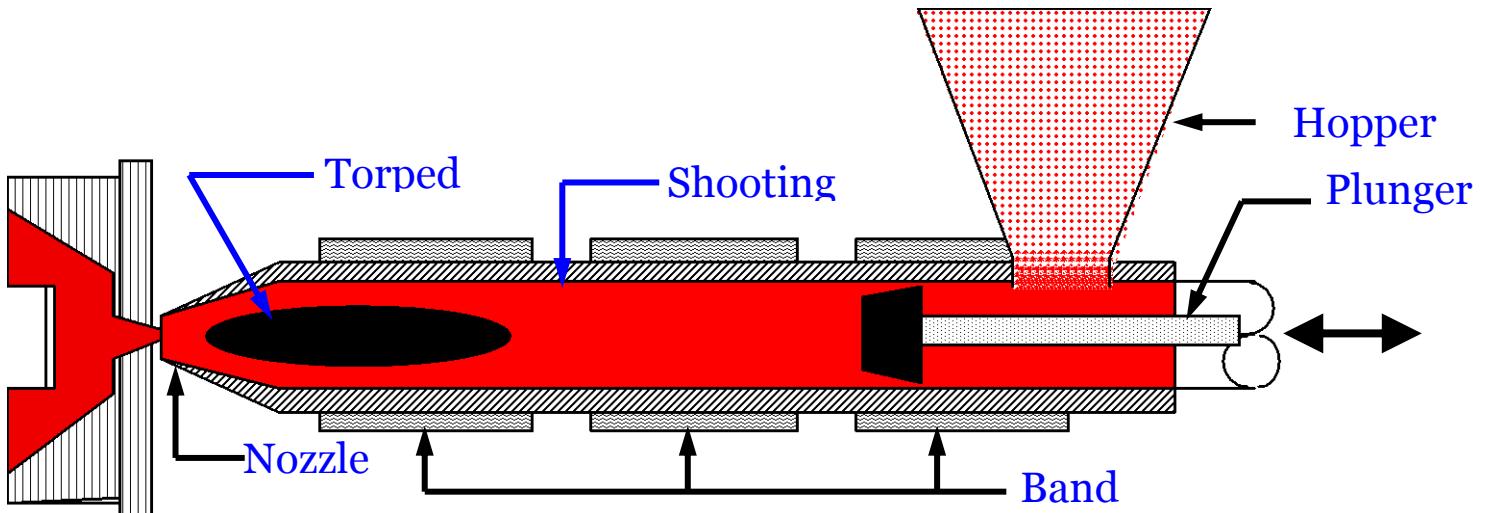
Schematic view of Plunger type Injection Molding Machine
